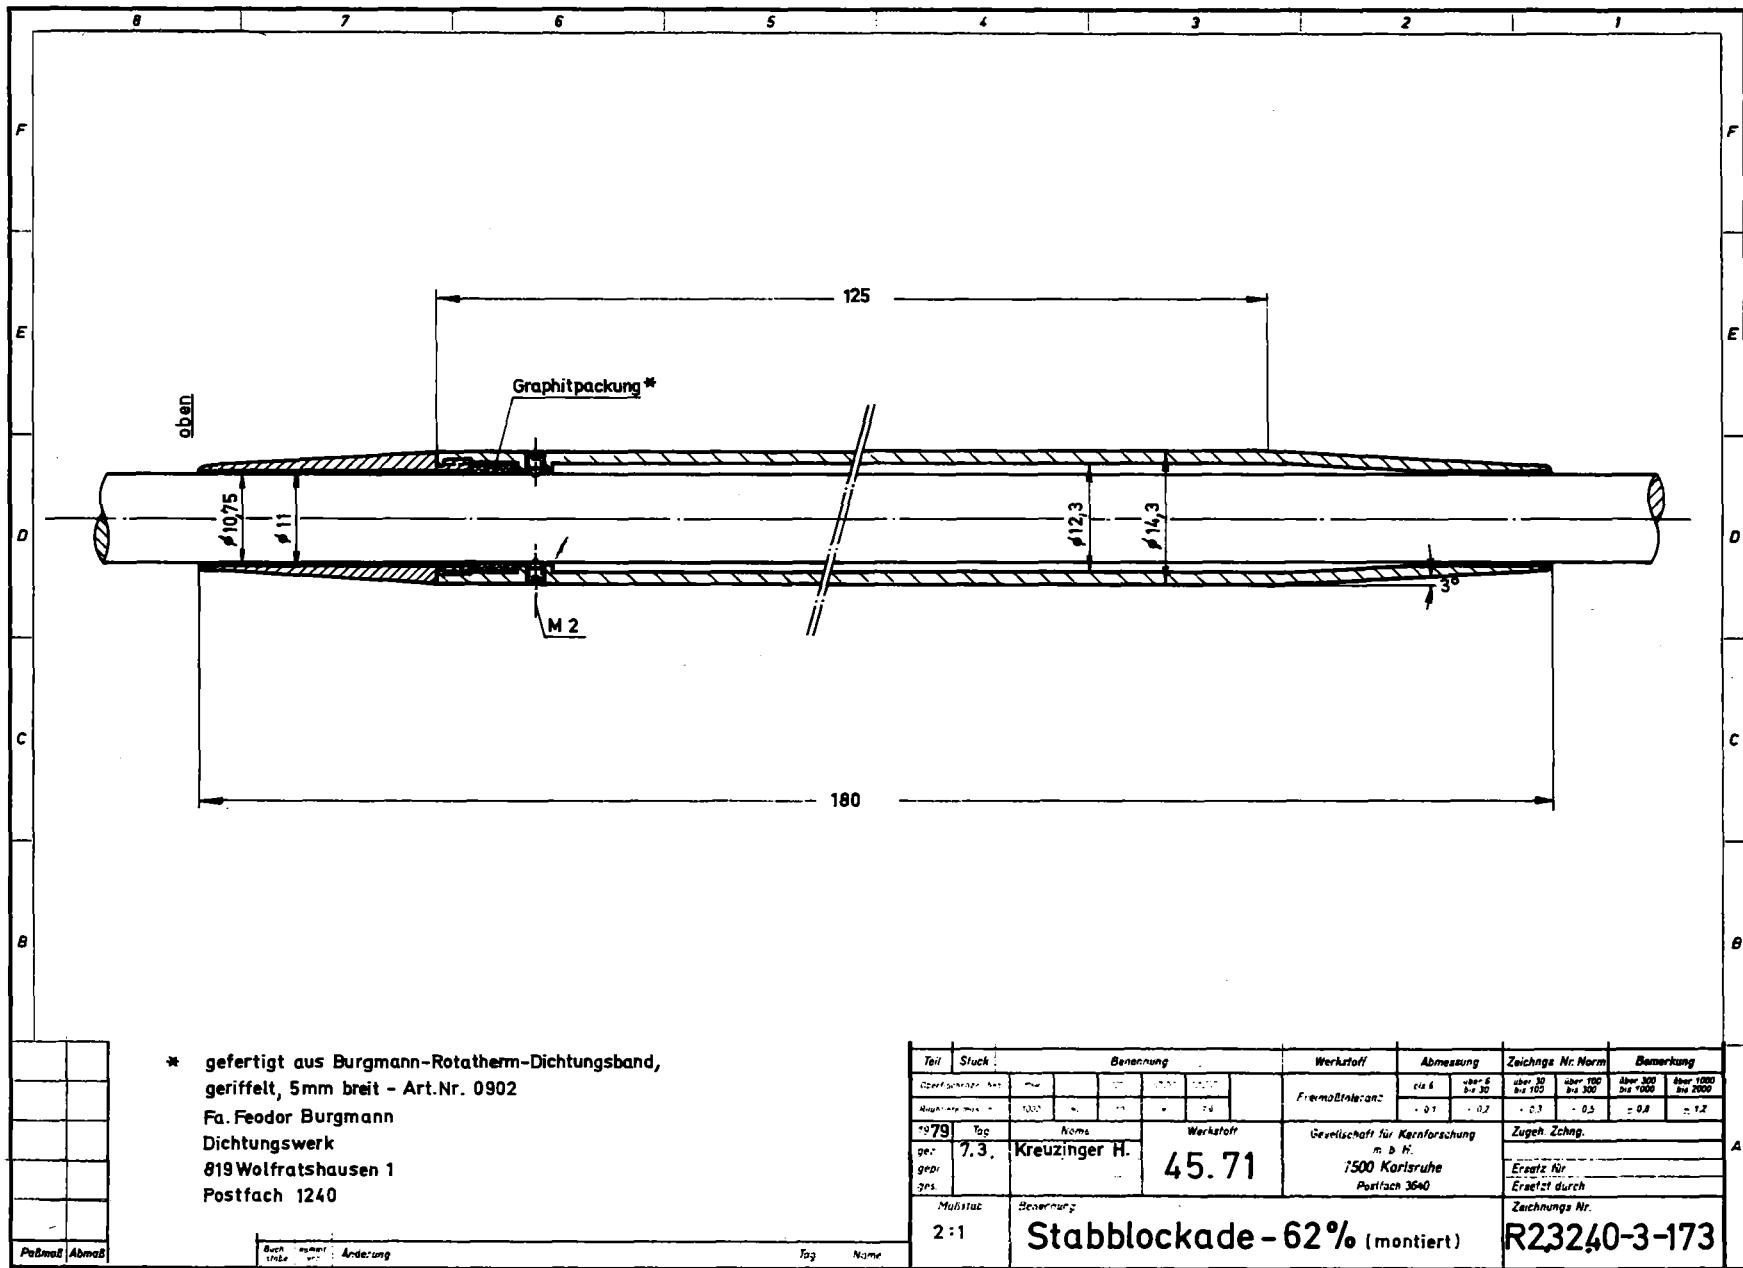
5x5 rod bundle: Working drawing of the 62% blockage device
